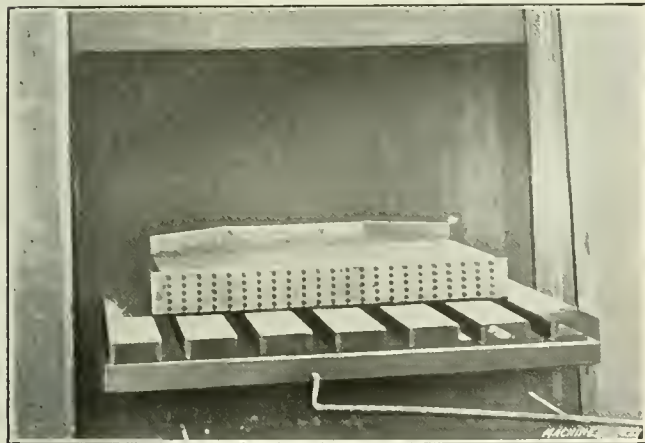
Fusing the Solder-covered Tubes with the Fins
